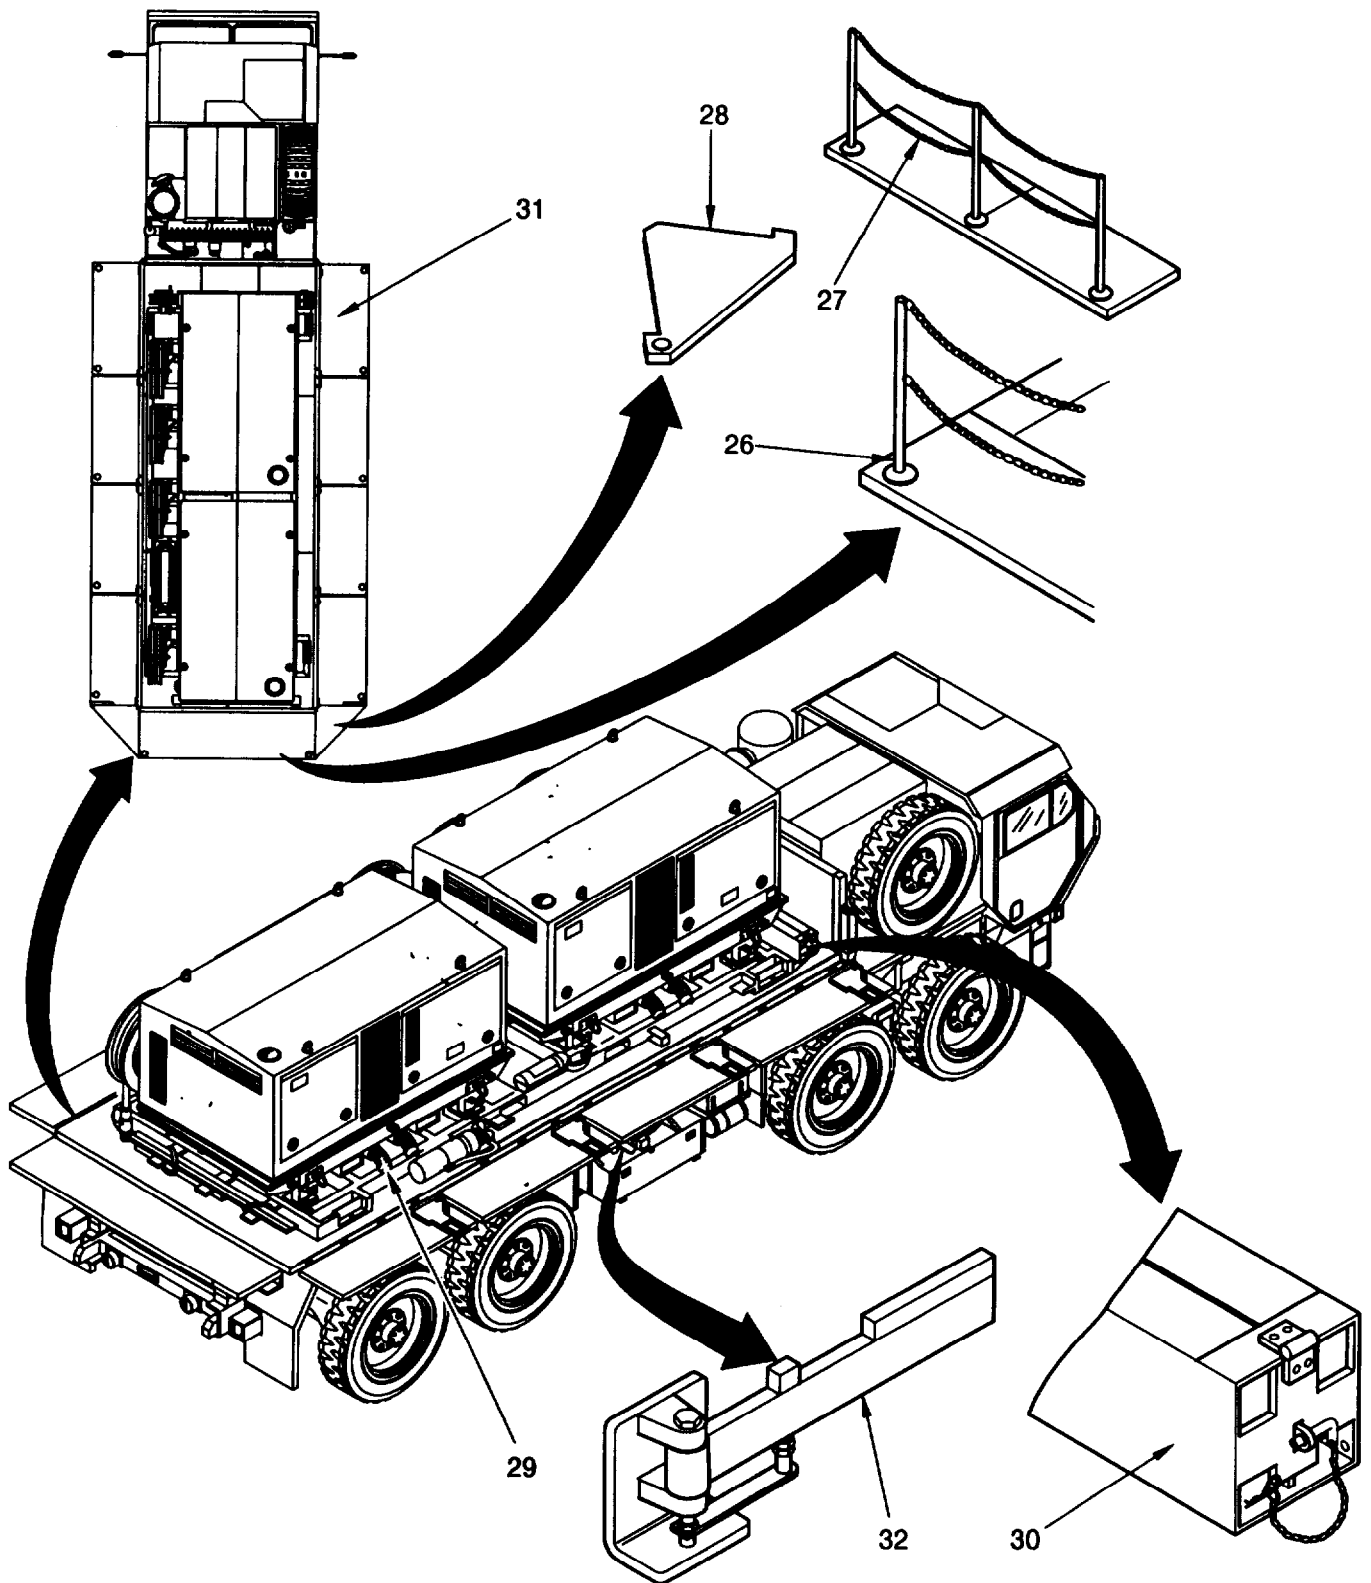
Converting EPP III to road travel configuration (sheet 3 of 3).
